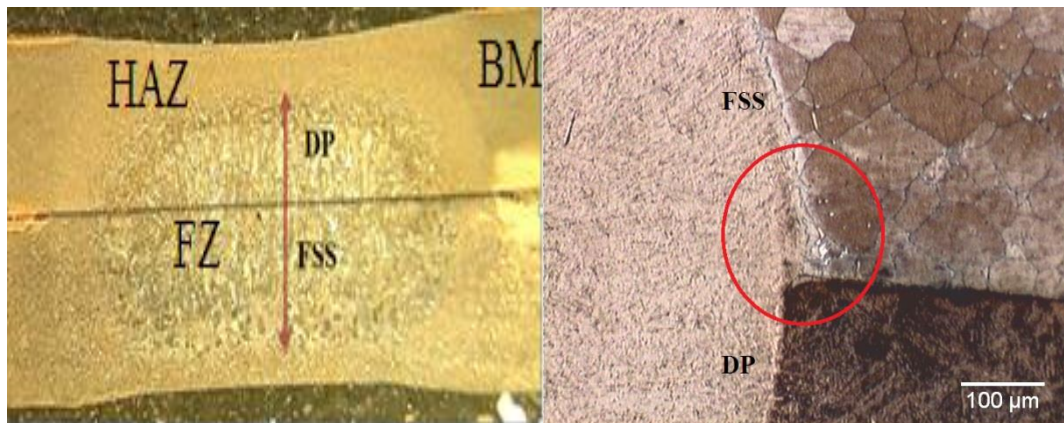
(a) Typical macrostructure of DP/FSS resistance spot welds, (b) the joint region between DP and FSS.
